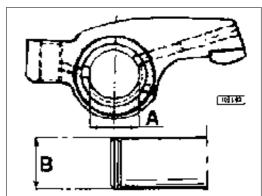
Bushing and rocker arm positions and wear check dimensions.
